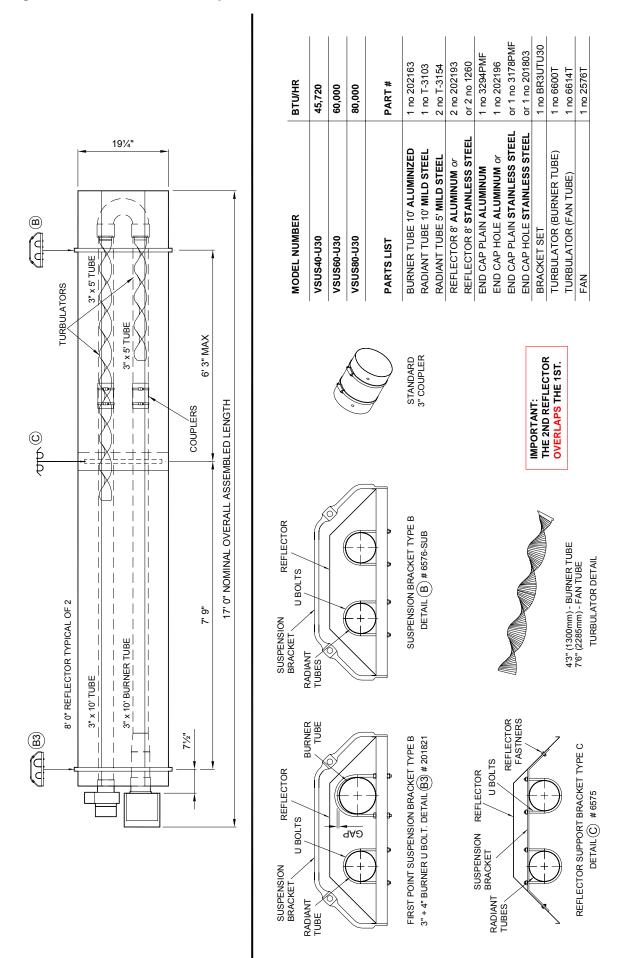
VSUS Heater Assembly: Model U tube 60U40 and 80U40
